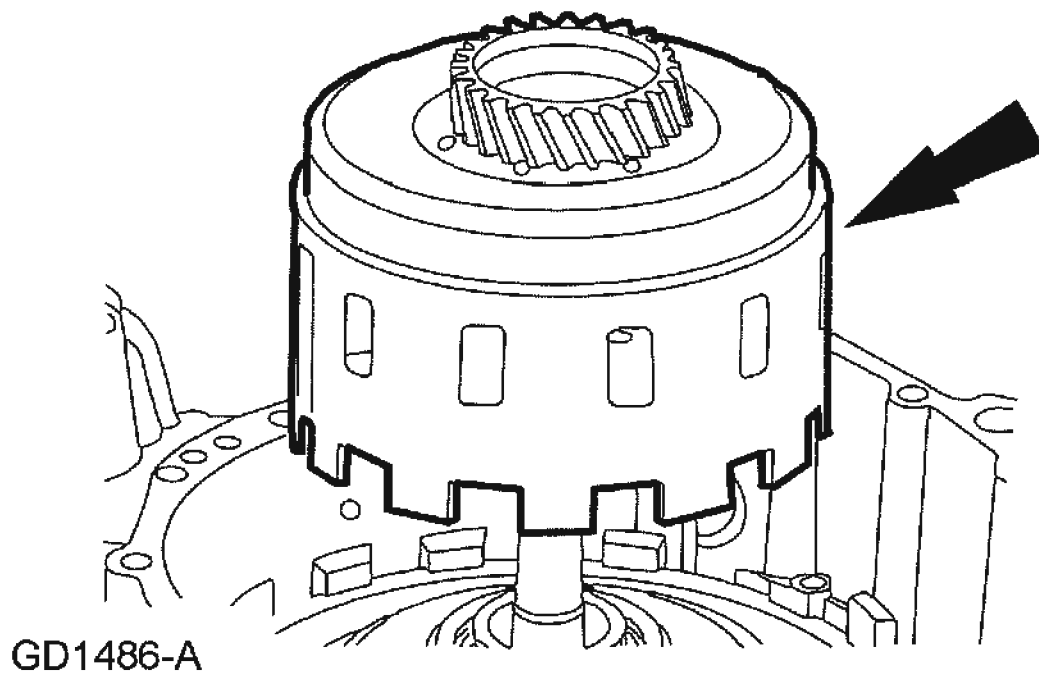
Removing Reverse/Overdrive Carrier Assembly With Captured No 8 Thrust Bearing
